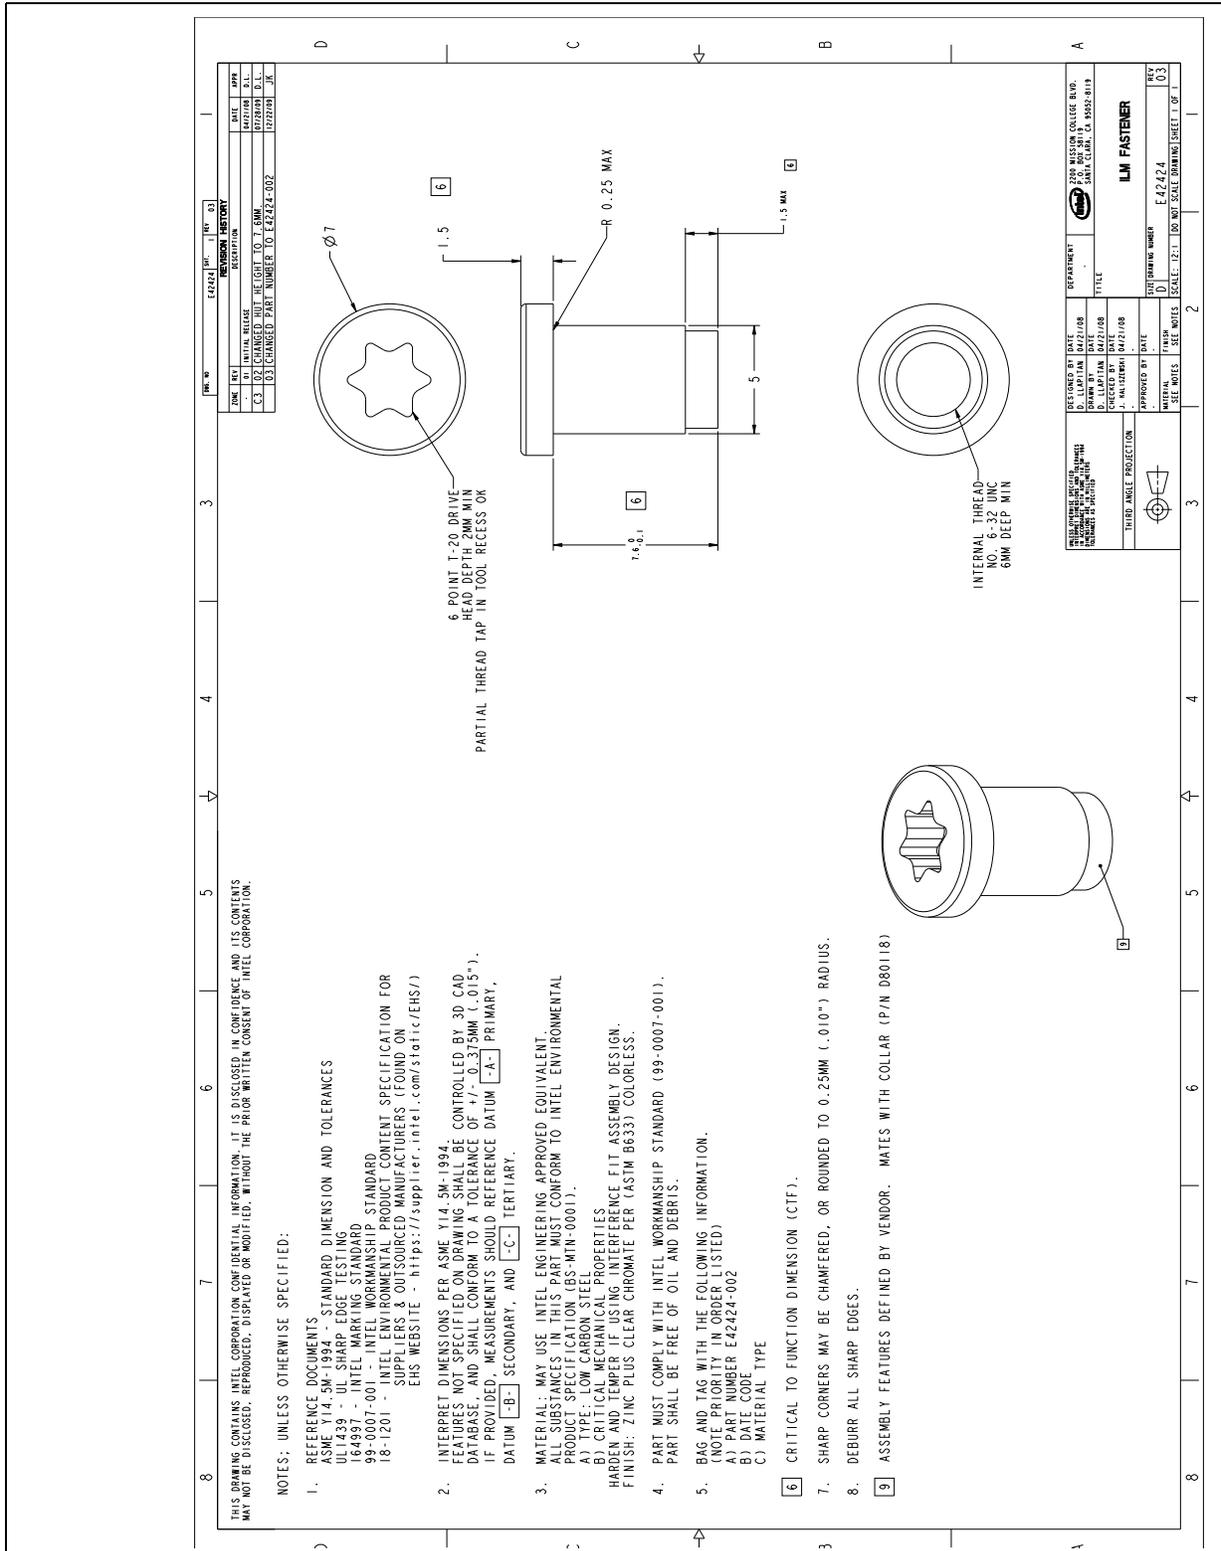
Low-Profile Independent Loading Assembly (LP-ILM) Mechanical Drawing – Sheet 4 of 8
